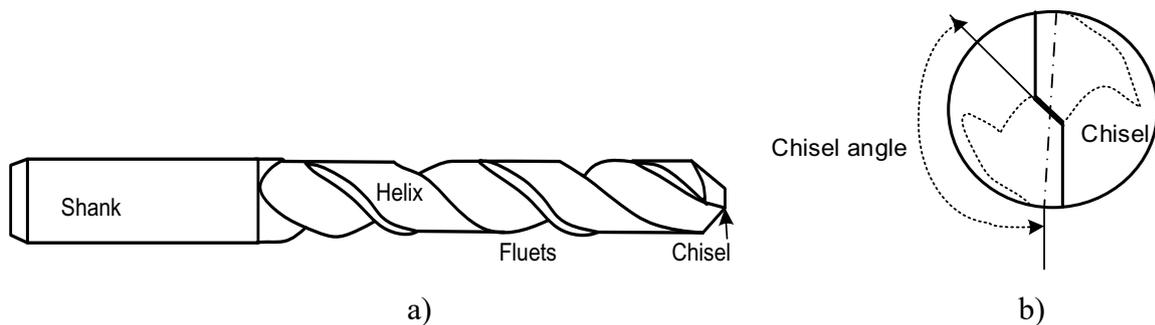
Schematic diagram showing a) front view and b) side view of a twist drill
